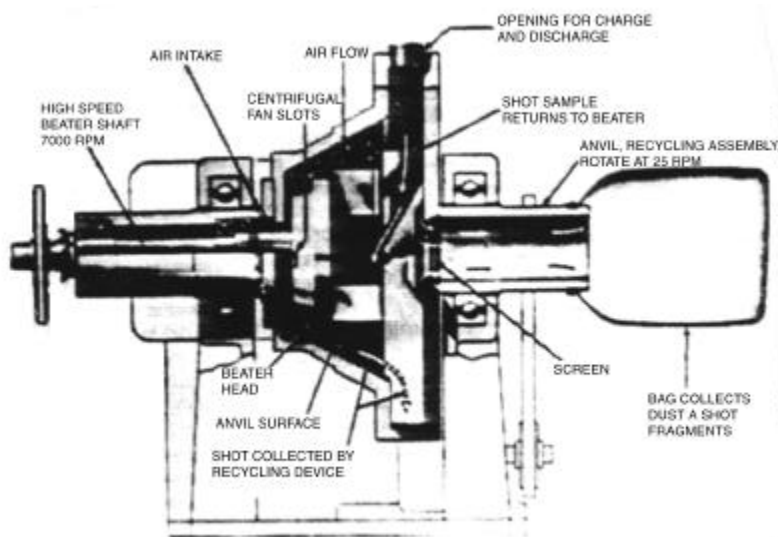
ALLOY METAL ABRASIVE CO. SHOT TESTER
